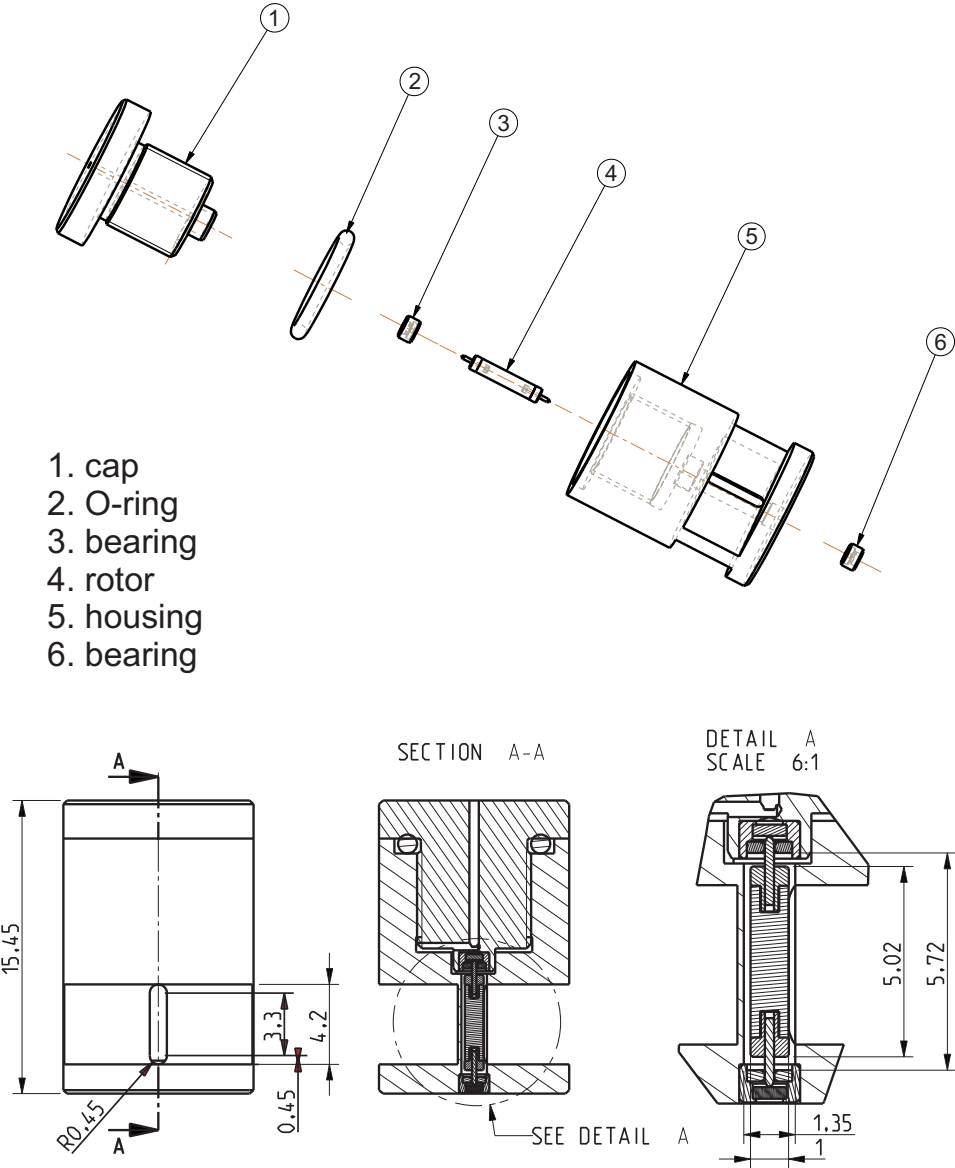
IGLUS demonstrator. Exploded and detailed views. Dimensions in mm.
